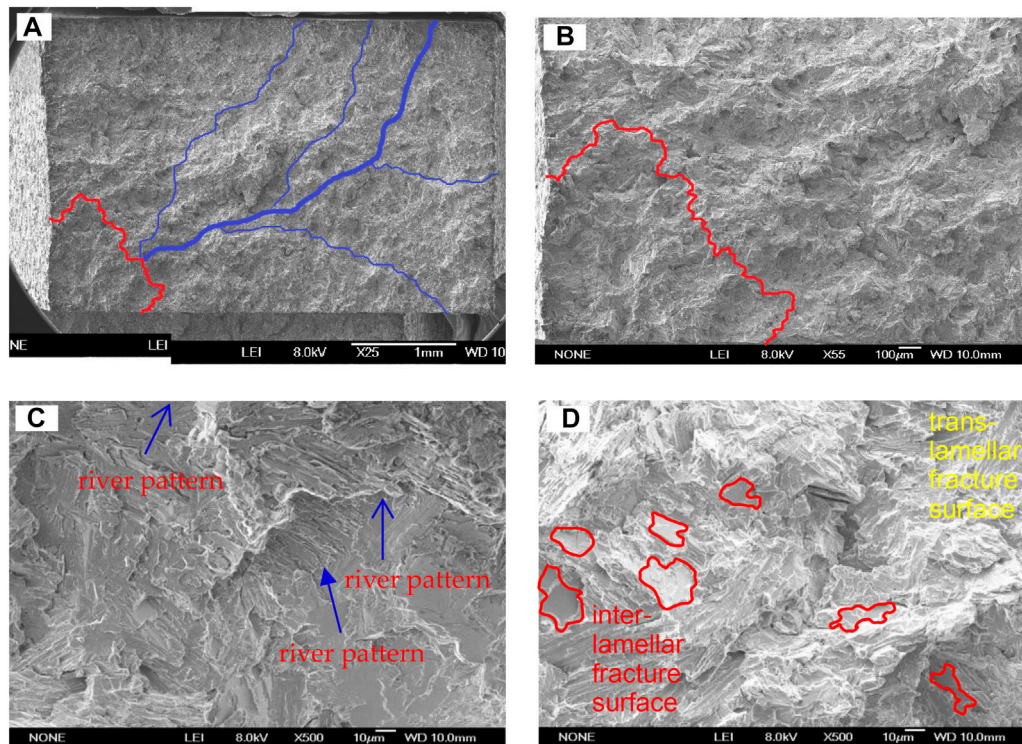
Fracture surface of the high Nb-TiAl alloy specimen SN04 in the tensile: (A) full view of fracture surface, (B) crack initiation area, (C) river pattern and fracture direction, and (D) trans-lamellar fracture and inter-lamellar fracture surface.
